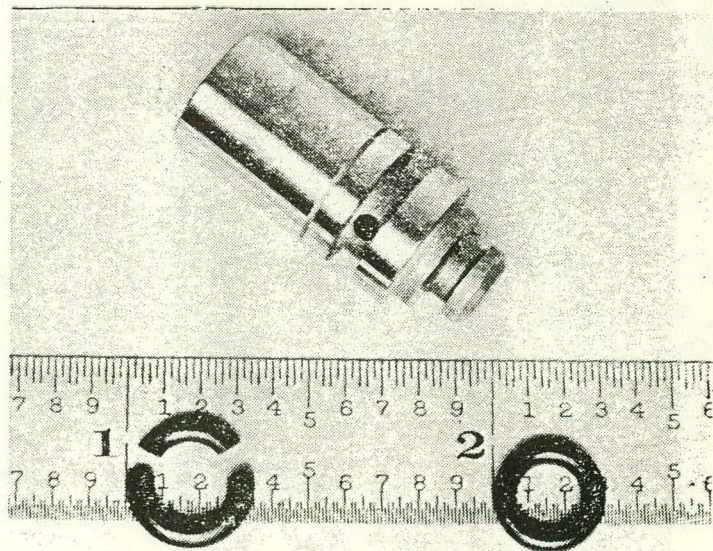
Line Pressure Regulator o-Rings from Car No. 176
